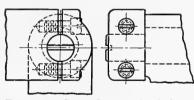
Capped eccentric pin bearing makes cover adjustable.
